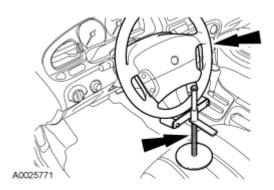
Holding Steering Wheel In Straight Ahead Position Courtesy of FORD MOTOR CO.
